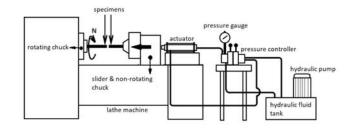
Lathe machine equipped with hydraulic powerpack system for RFW experiments
